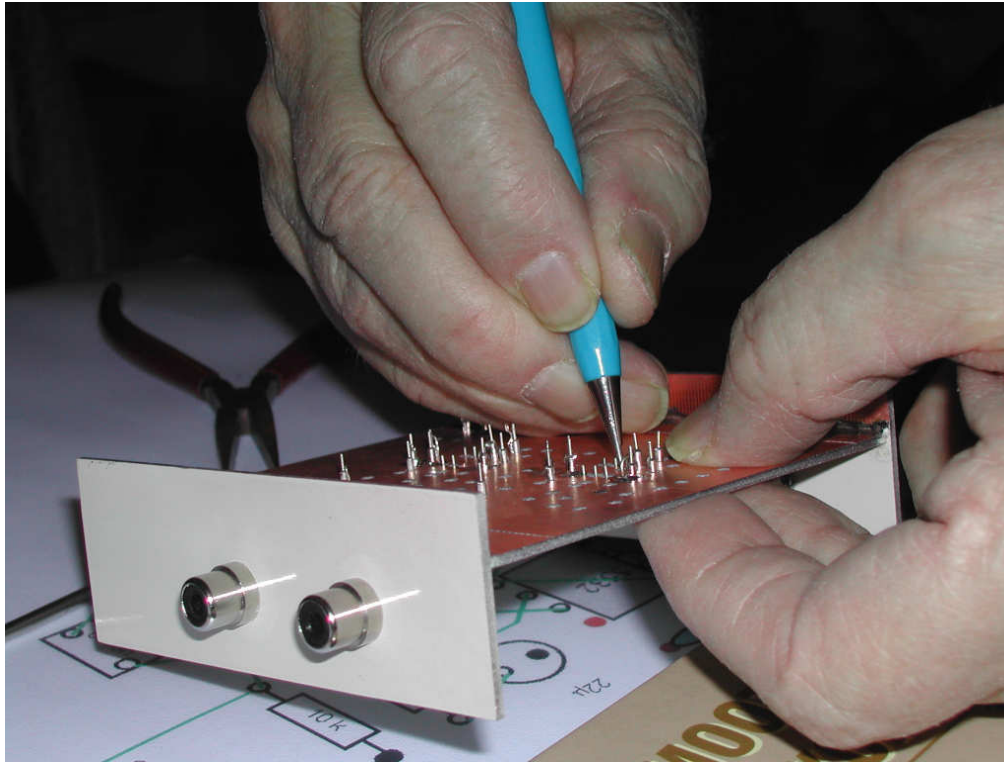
DIY wire wrapping tool made of pen in use (Tomi Engdahl)
